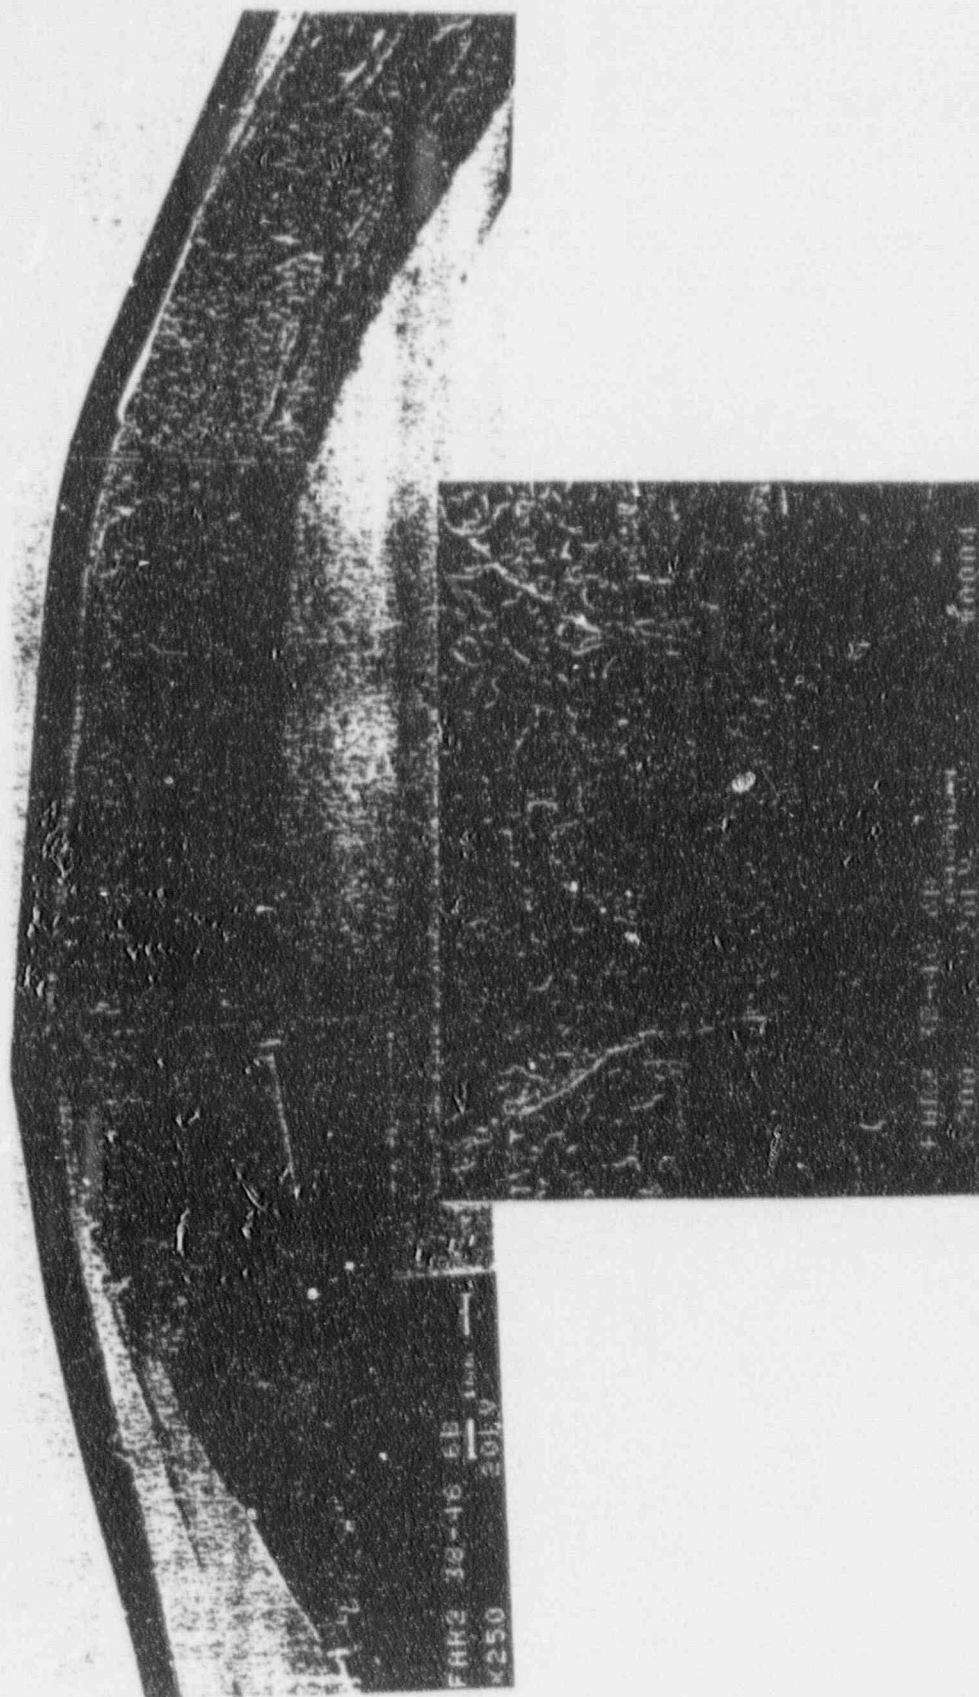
Fractographic features seen on the opened burst fracture in Tube R38-C46 at the first support plate.
